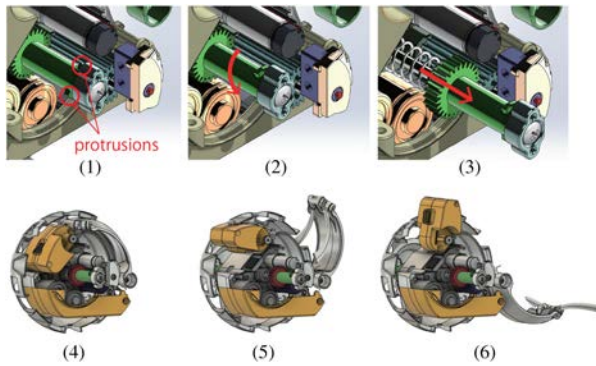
Transformational mechanism and sequence. The rotational shaft pushes the hemispherical wheels outward to ensure that the head and tail stabilizer are deployed.
